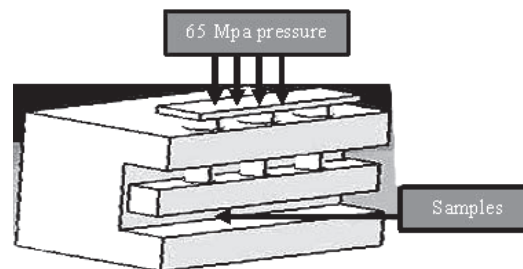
Fixture used to apply 65MPa uniaxial pressure.
